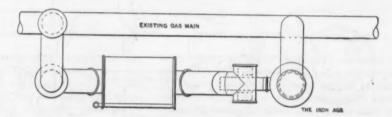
A Secondary Cleaning Plant, Slightly Modified, to Attach to an Existing Gas Main.
